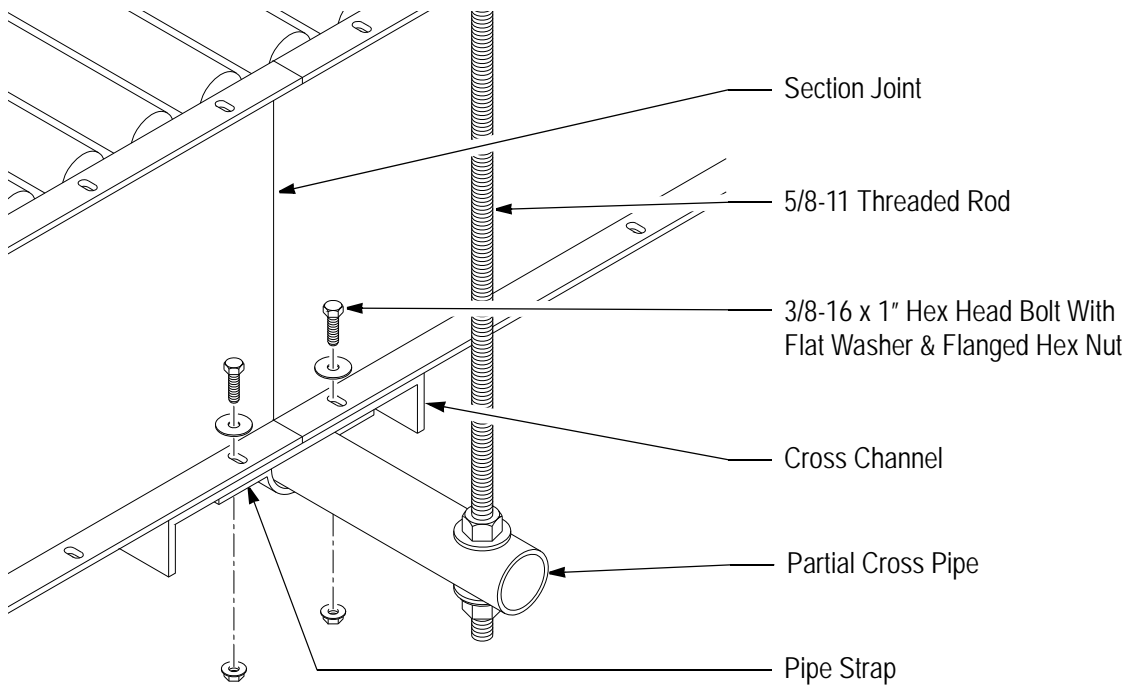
Installing a Ceiling Hanger at a Double-Wide Conveyor Section Joint
